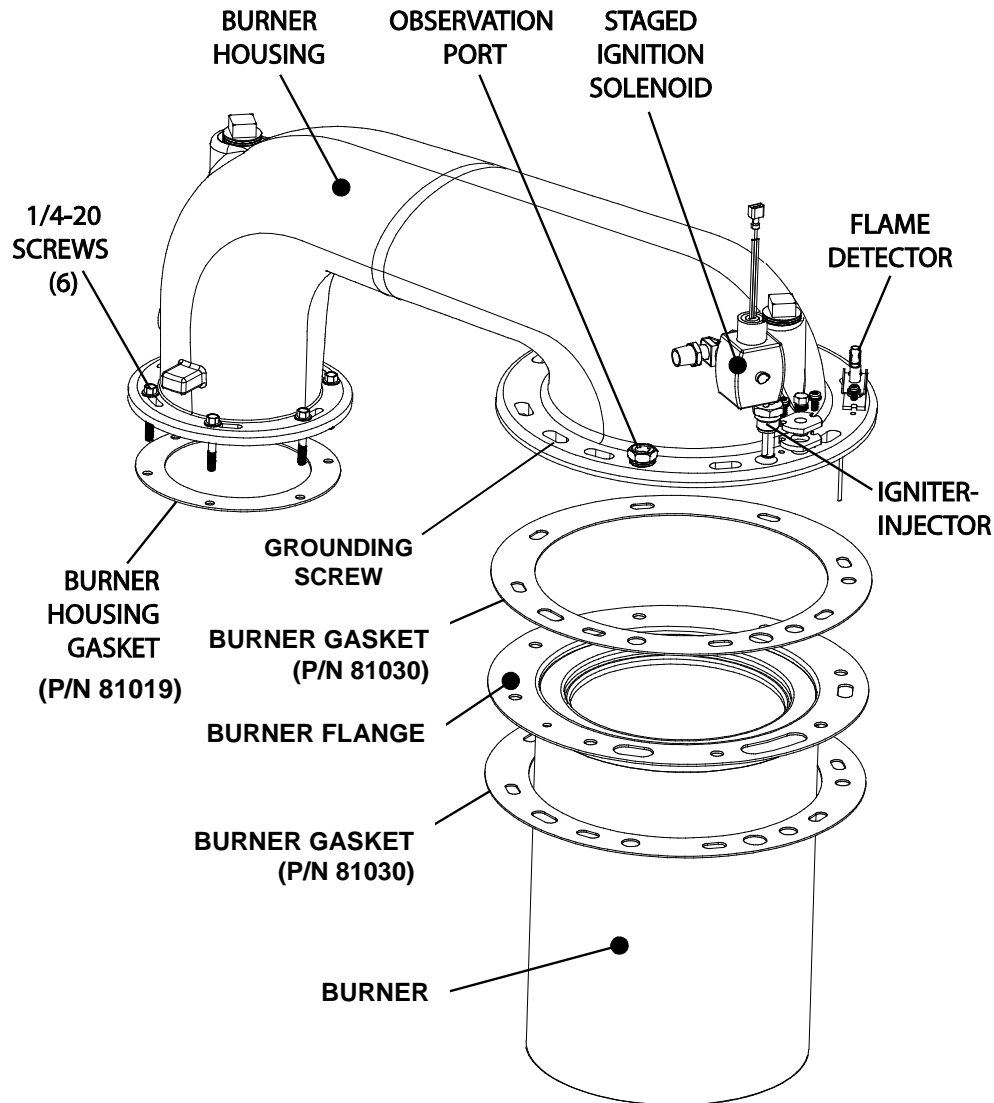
BMK3.0LN Burner Assembly - Exploded View
